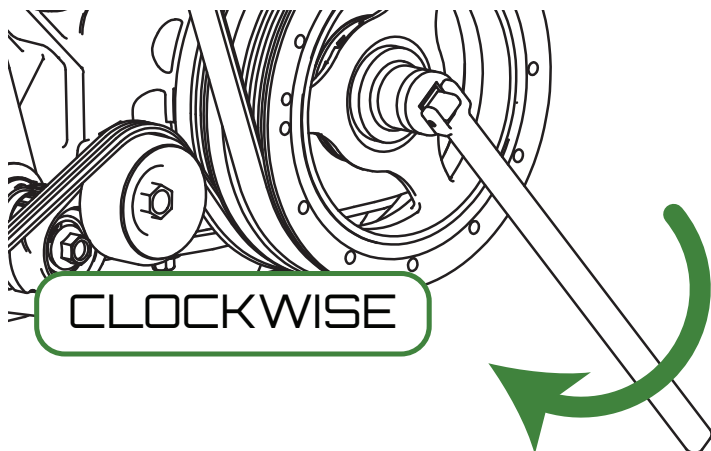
Rotating the Engine Crankshaft with a Breaker Bar
